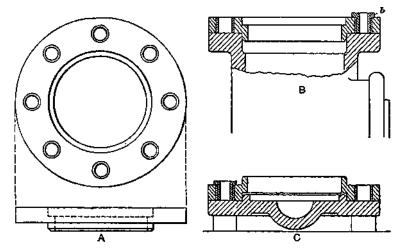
Jig for Cylinder Flange and Head, and its Application
